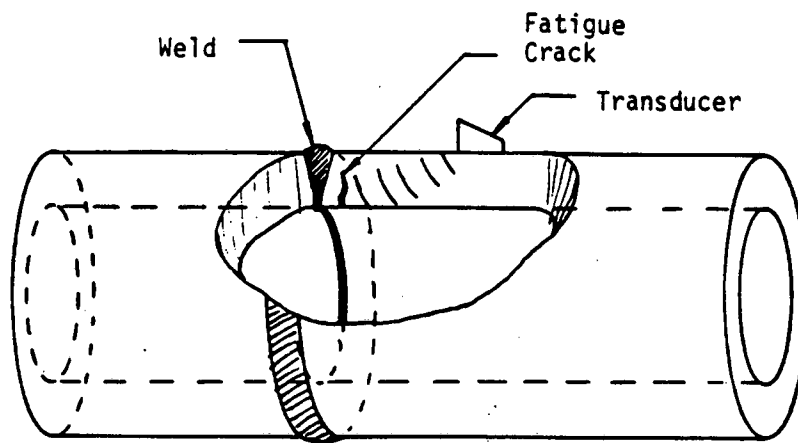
Welded connector example of tension leg tendon with fatigue crack in the heat affected zone of weld.
